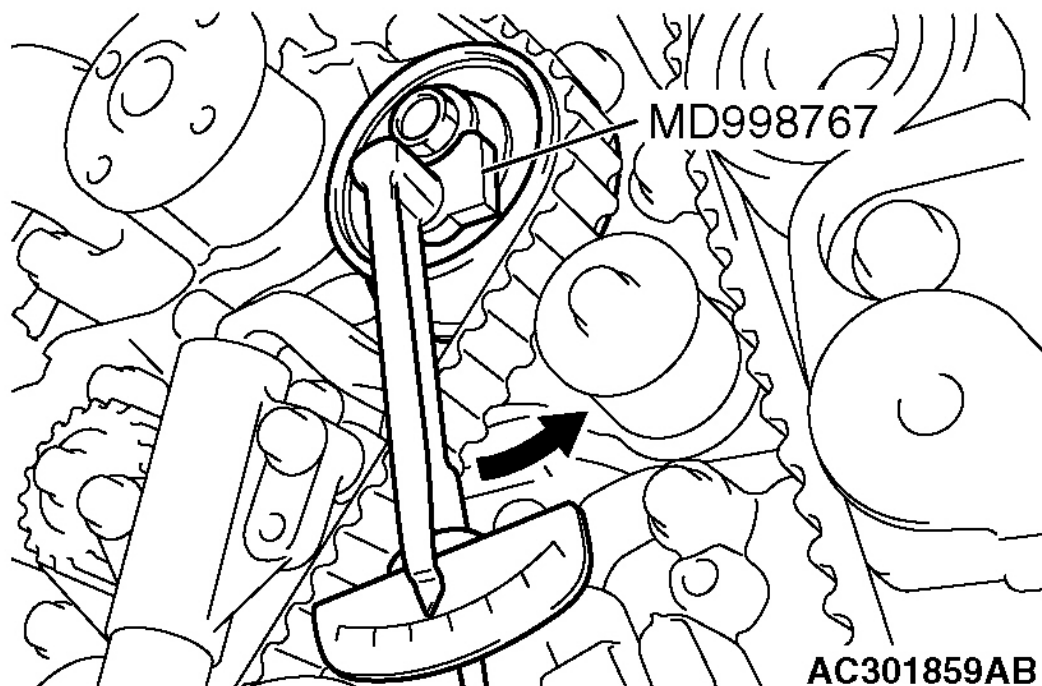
Tightening Timing Belt Tensioner Pulley Mounting Bolt To Specified Torque
